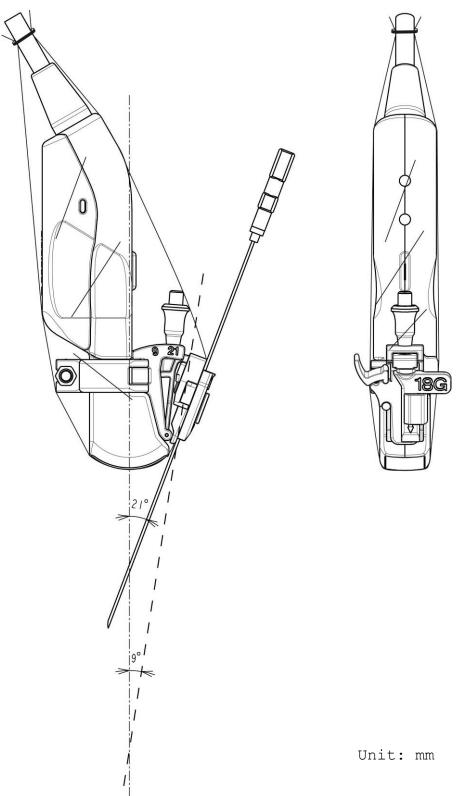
External view (with Ultra-Pro II Needle Guide / cover kit)
